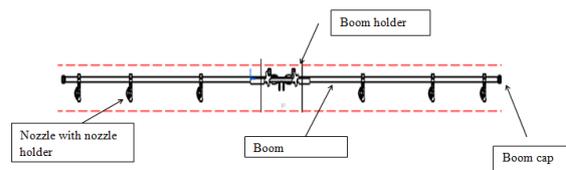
Boom, Nozzle and Boom Holder Assembly Complete Sprayer Assembly
